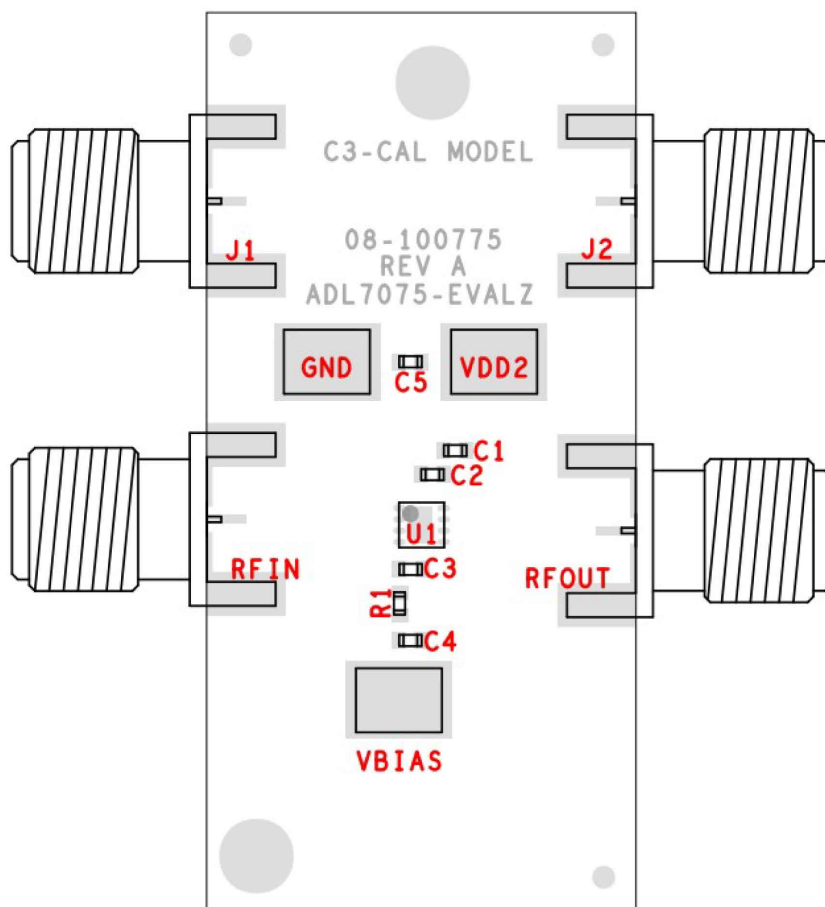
ADL7075-EVALZ Assembly Drawing (J1 and J2 Are Not Installed)
